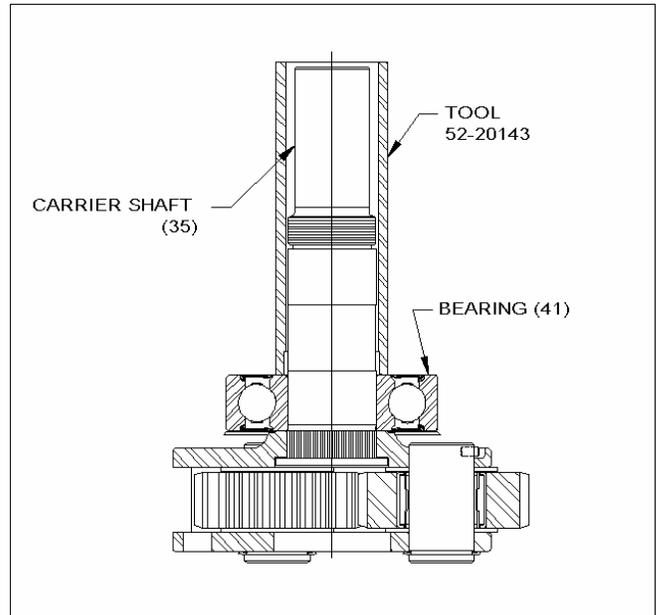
Pressing Rear Bearing onto Carrier Shaft
